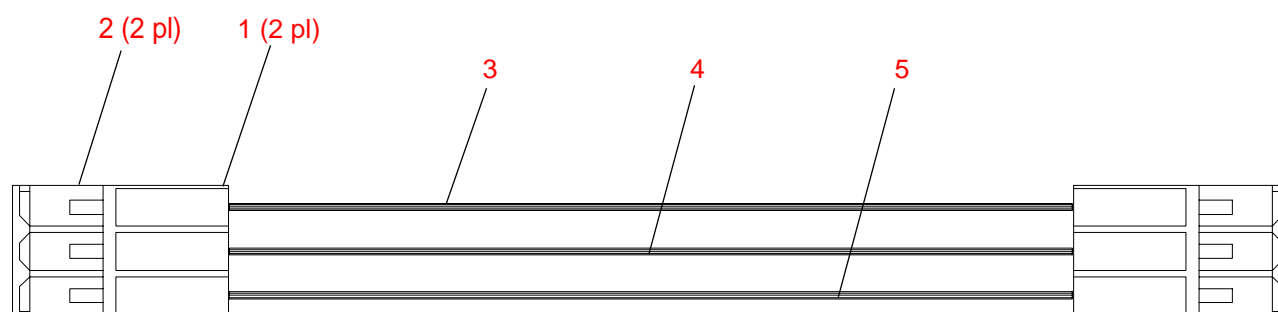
WH1 Sensor Jumper Cable Assembly
